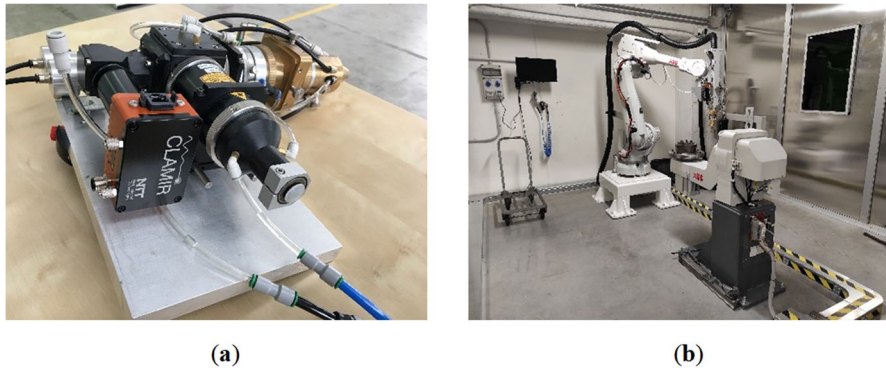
(a) CLAMIR installation in cladding head (b) Machine set-up
